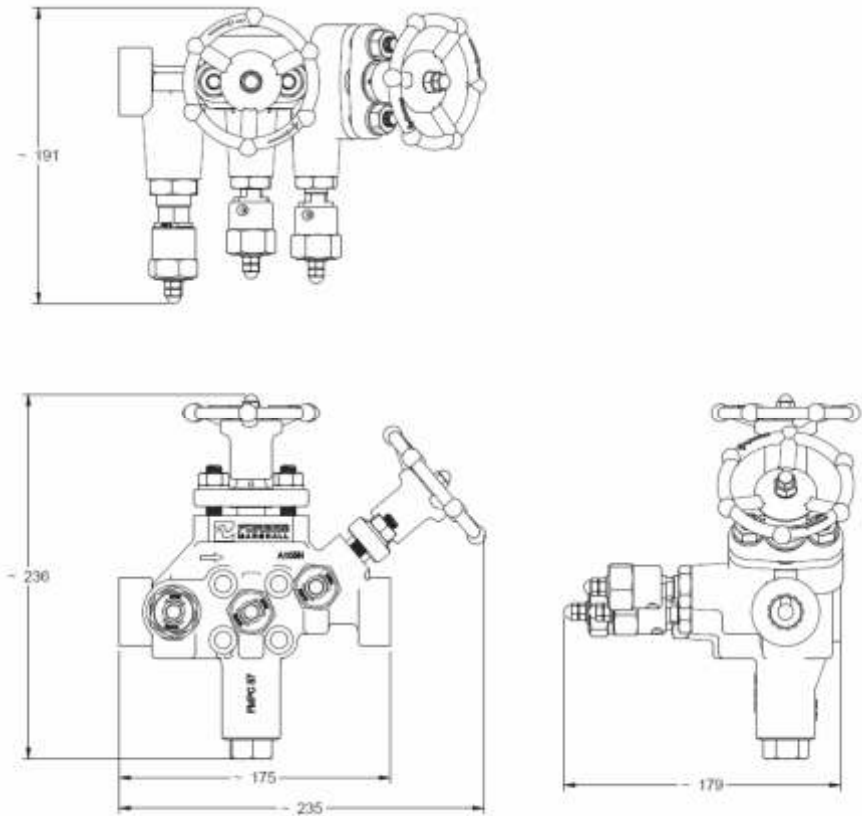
A: Dimension Drawing of FMPC57 without BDV
